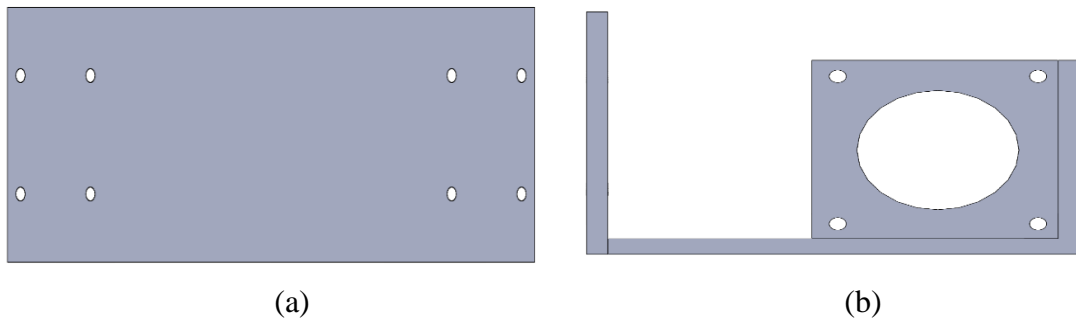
Y-axis Motor Holder (a) Front View and (b) Side View
